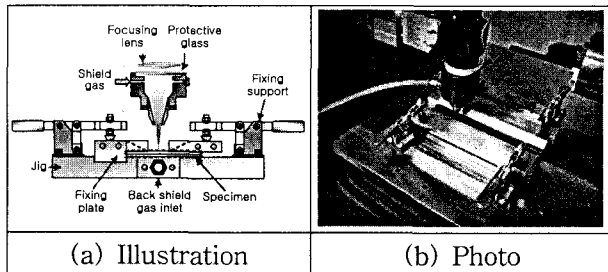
Schematic illustration and photo of Lap welding
